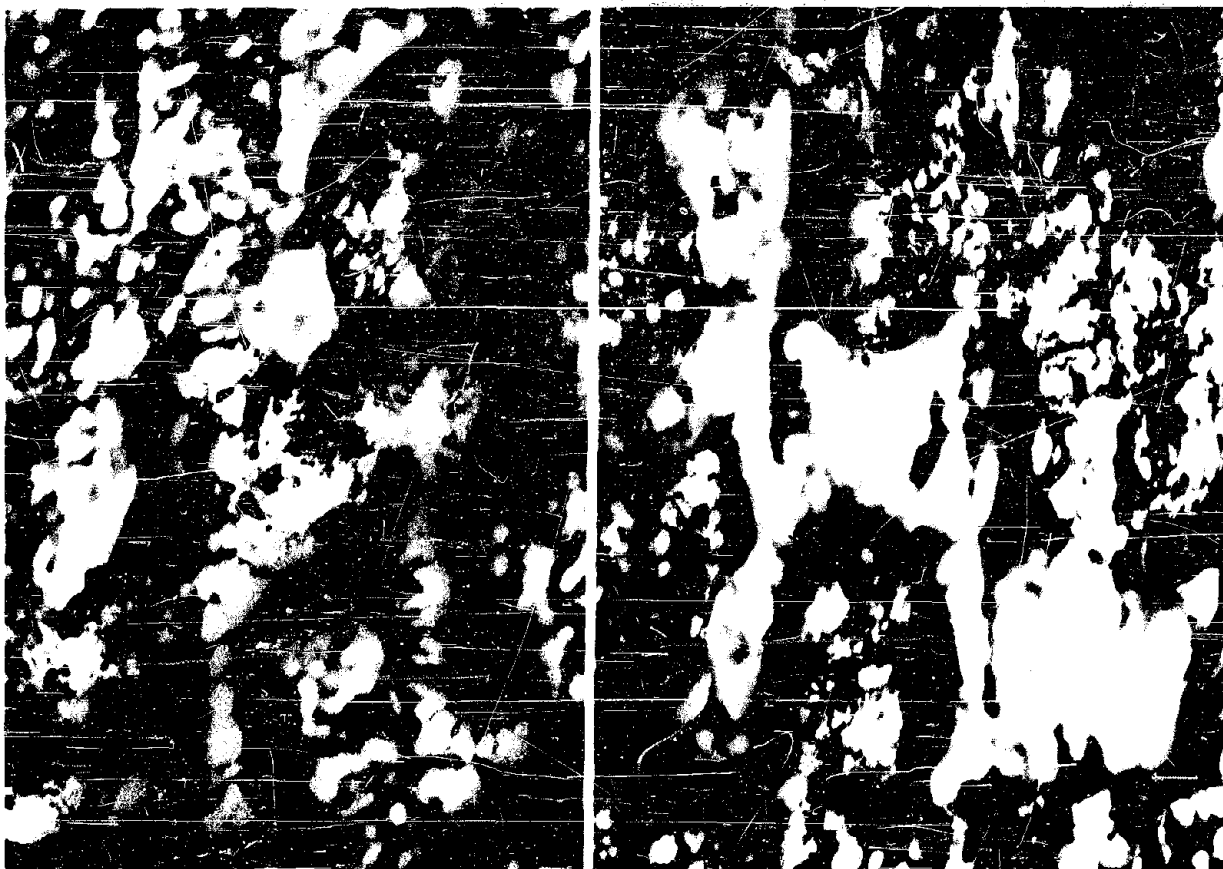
Fracture Surface of Silver Joint in Steel (10X);
